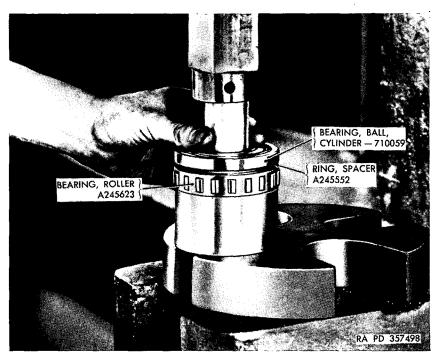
Pressing roller bearing, spacer ring, and ball bearing off pump shaft.
